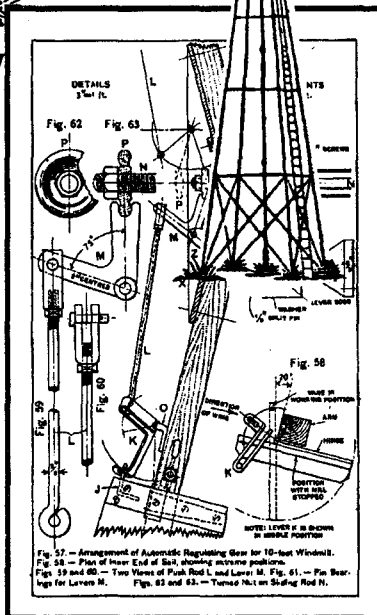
Arrangement of Automatic Regulating Gear for 10-foot Windmill.
